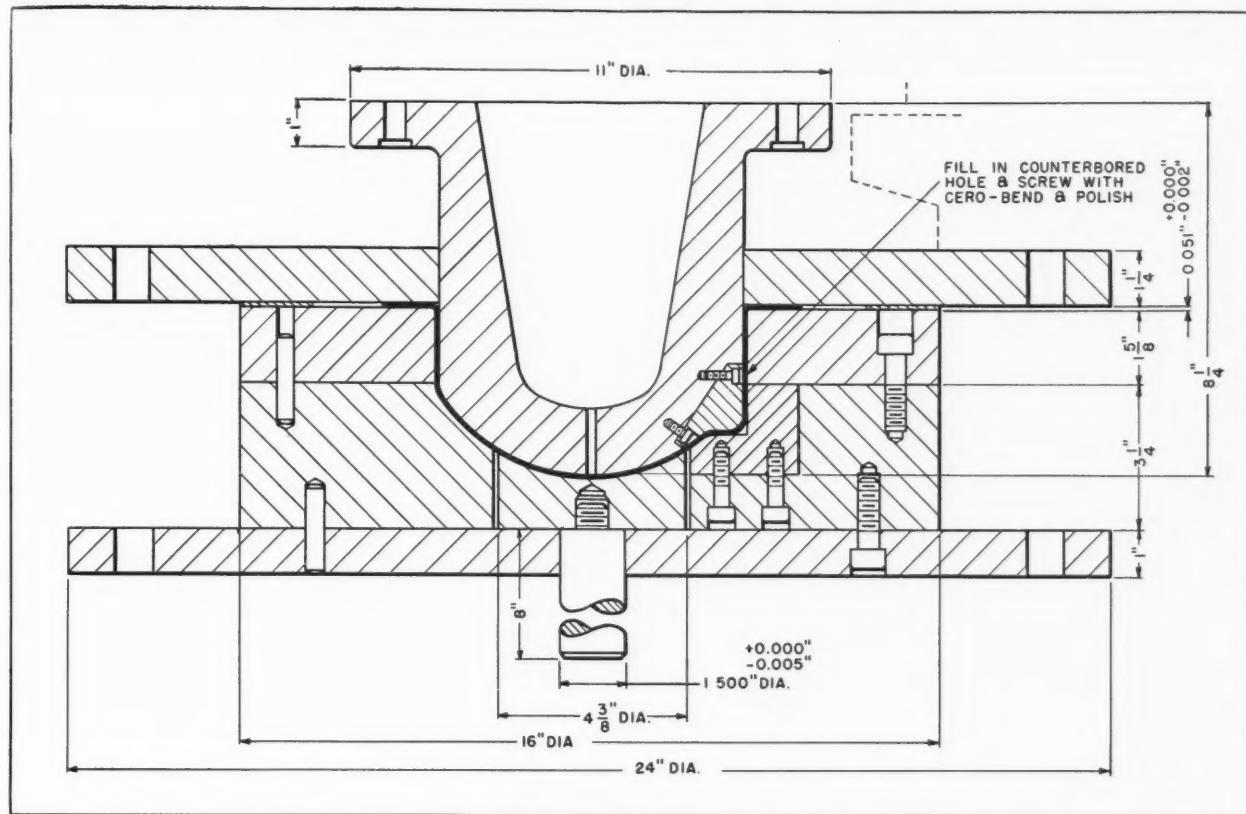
Assembly drawing of the die that draws Gyrosyn covers such as illustrated in Fig. 6. A steel insert on the Kirksite punch produces the bulge, when specified, but is replaced by another insert when covers without a bulge are to be made
